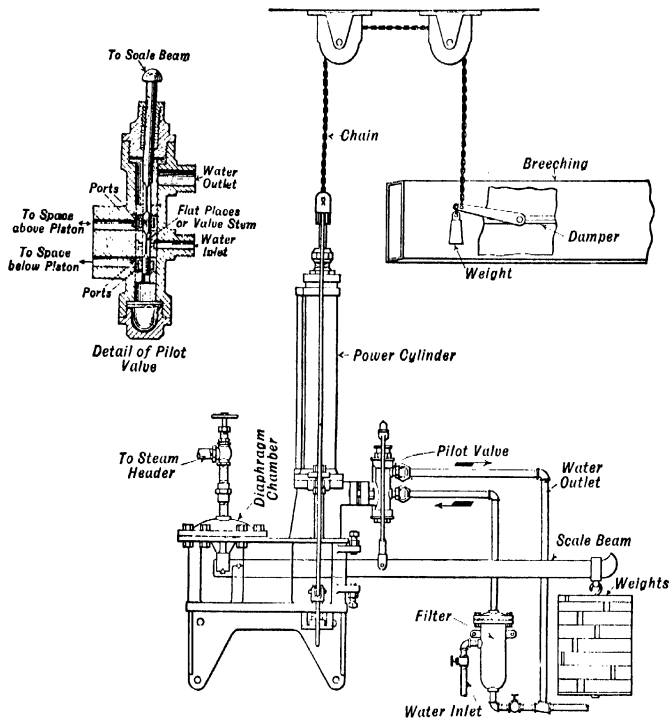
R-K Double Acting Hydraulic Damper Regulator.
